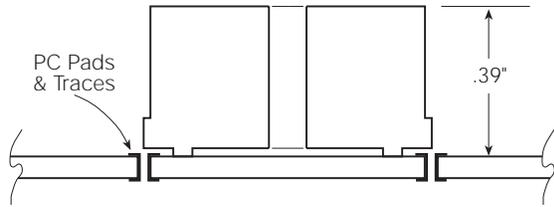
The seated height of a standard, PC mounted 7/9-pin tube socket is shown above. Use this to gauge the increase in the seated height of tubes fitted into any of the ISO-SOCKETS shown on this page.
